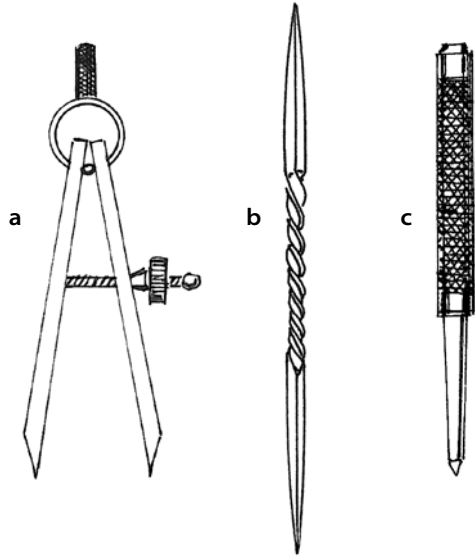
Marking tools: a. dividers; b. scribe; c. center punch.
